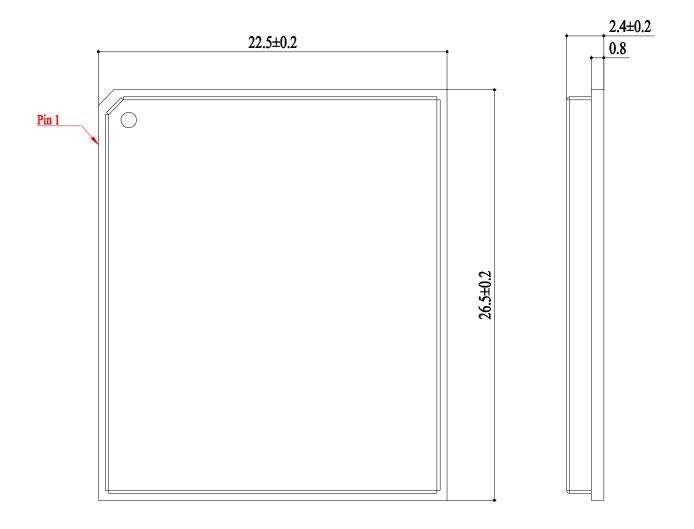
EG916Q-GL Top and Side Dimensions (Unit: mm)
